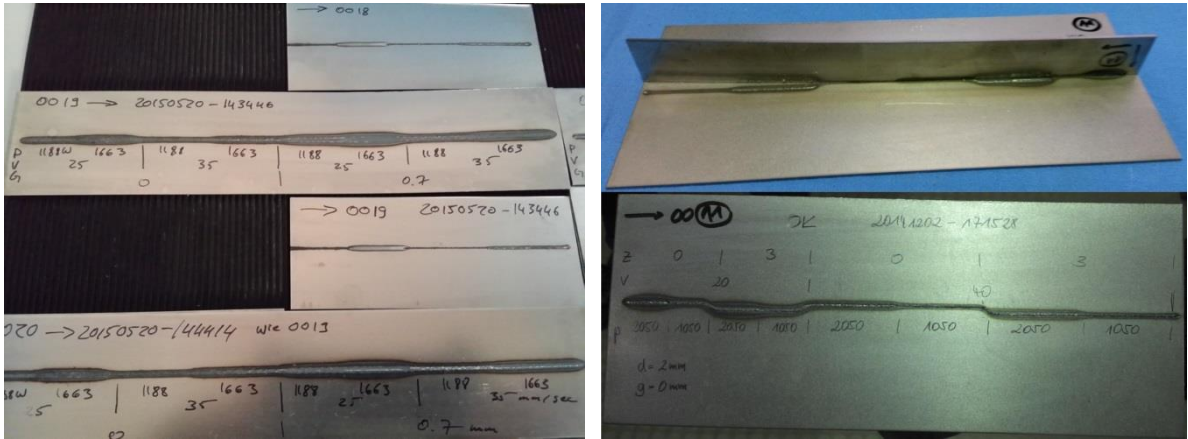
(a) workpieces from overlap welding with/without gaps; (b) workpieces from T-joint welding with/without lateral offset x
